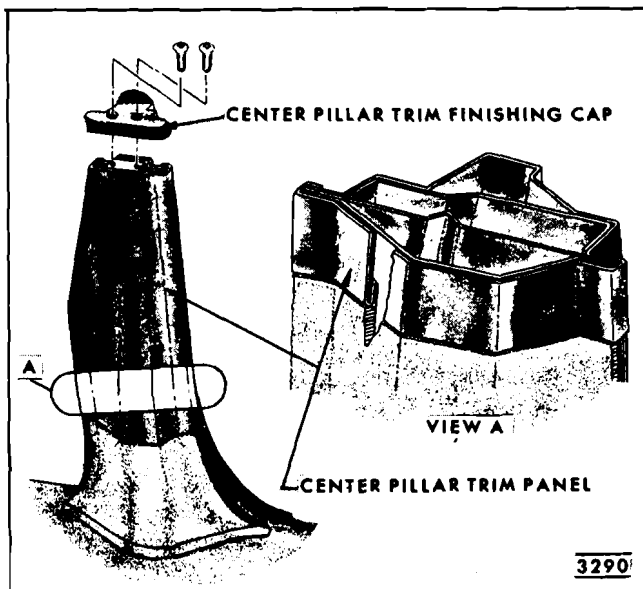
Center Pillar Trim "A-B and C-39, 49" Styles. (26239 Custom, 48439, 682-68349 Styles Shown, Others Similar)
